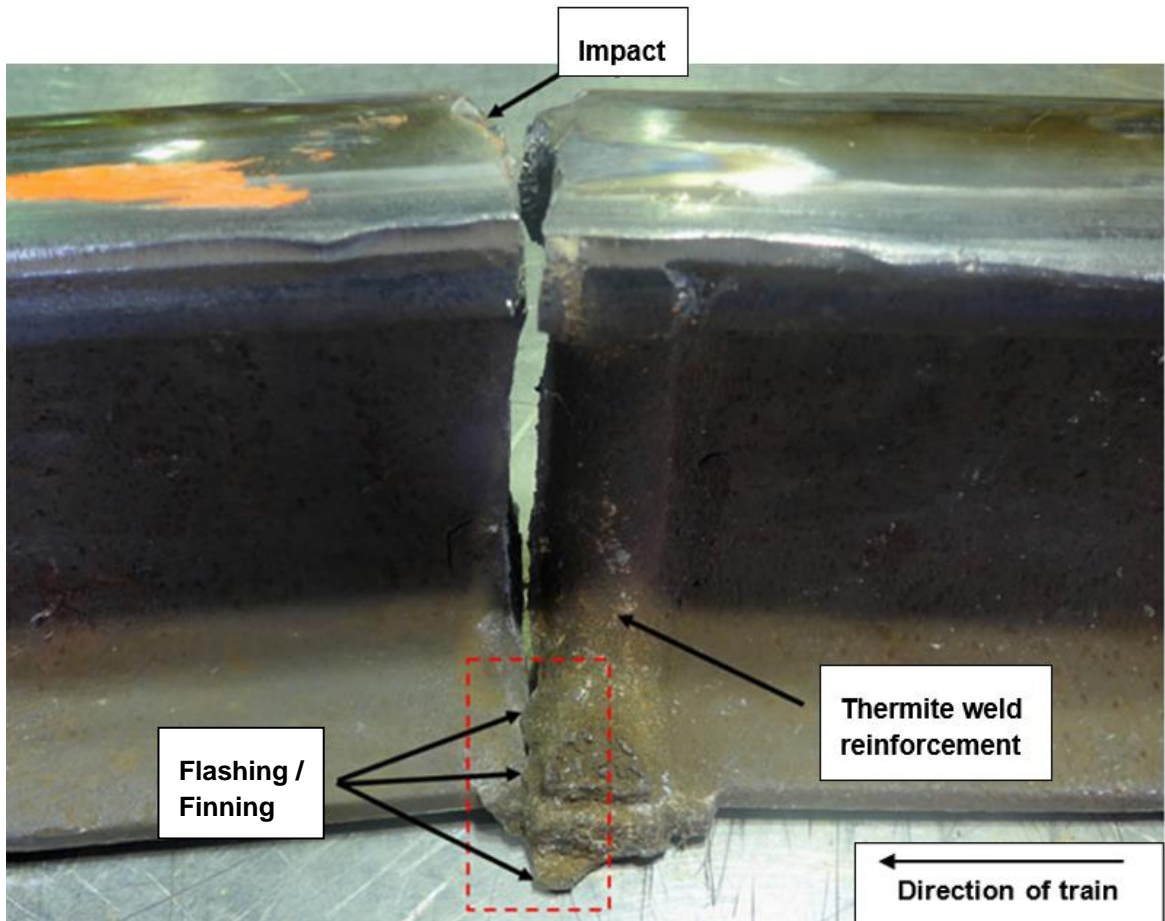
Flashing/finning of the rail weld due to a gap between weld mould and rail (should be ground off post-weld)
